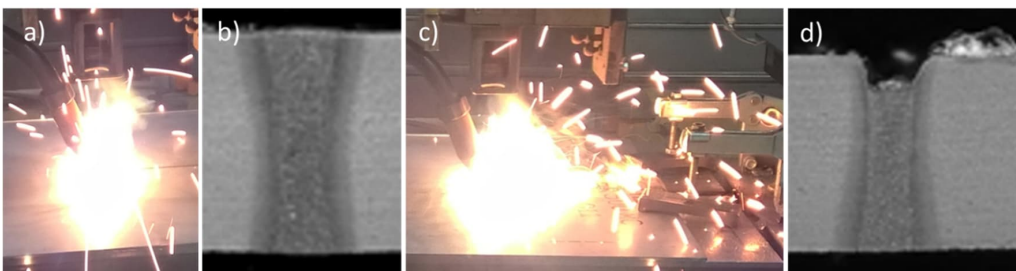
Laser welding of structural steel ( $t = 3$  mm). Higher welding values: a) spatter formation, b) cross-section of laser weld; lower welding values: c) spattering and d) cross-section of laser weld.
